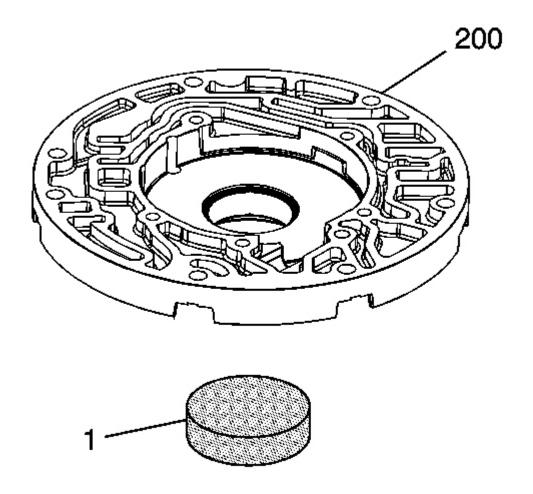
Identifying J 41778-2 Special Tool & Pump Body Bushing Courtesy of GENERAL MOTORS CORP.
